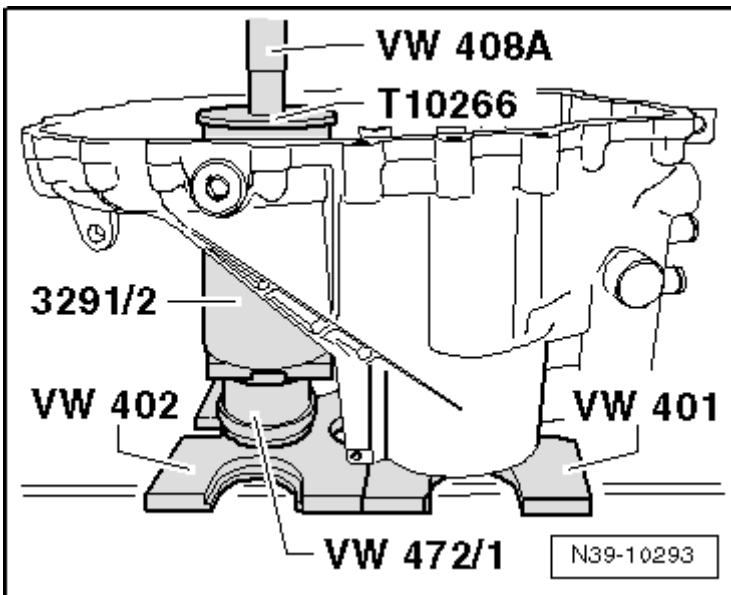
Installing Outer Race/Tapered Roller Bearing Into Transmission Housing
